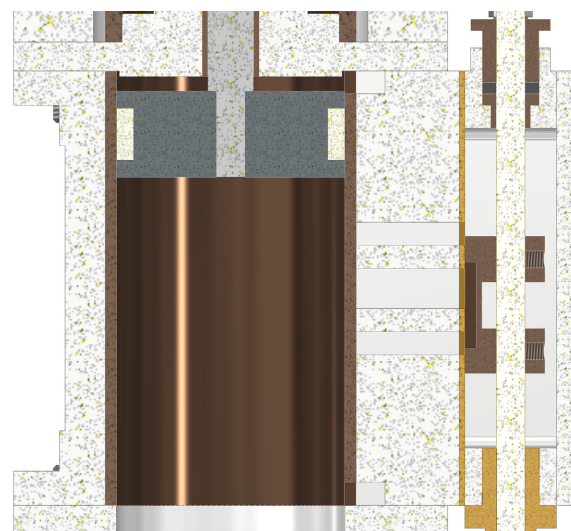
Cross-section of the valve chest showing the slide valve: left view (left) and rear view (right).
